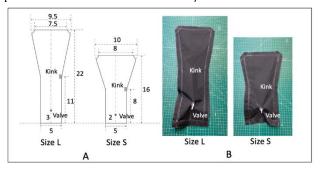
The sketch (left) and the photograph (right) of the fabricated inflatable pneumatic bladder, showing the dimensions (cm) of the bladder and locations of the inflation valve and kink
